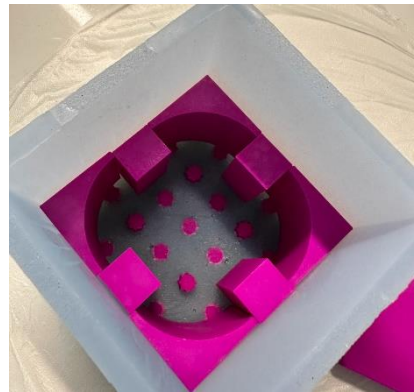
Sample of learner constructing the mold to make a four-leaf clover shape
